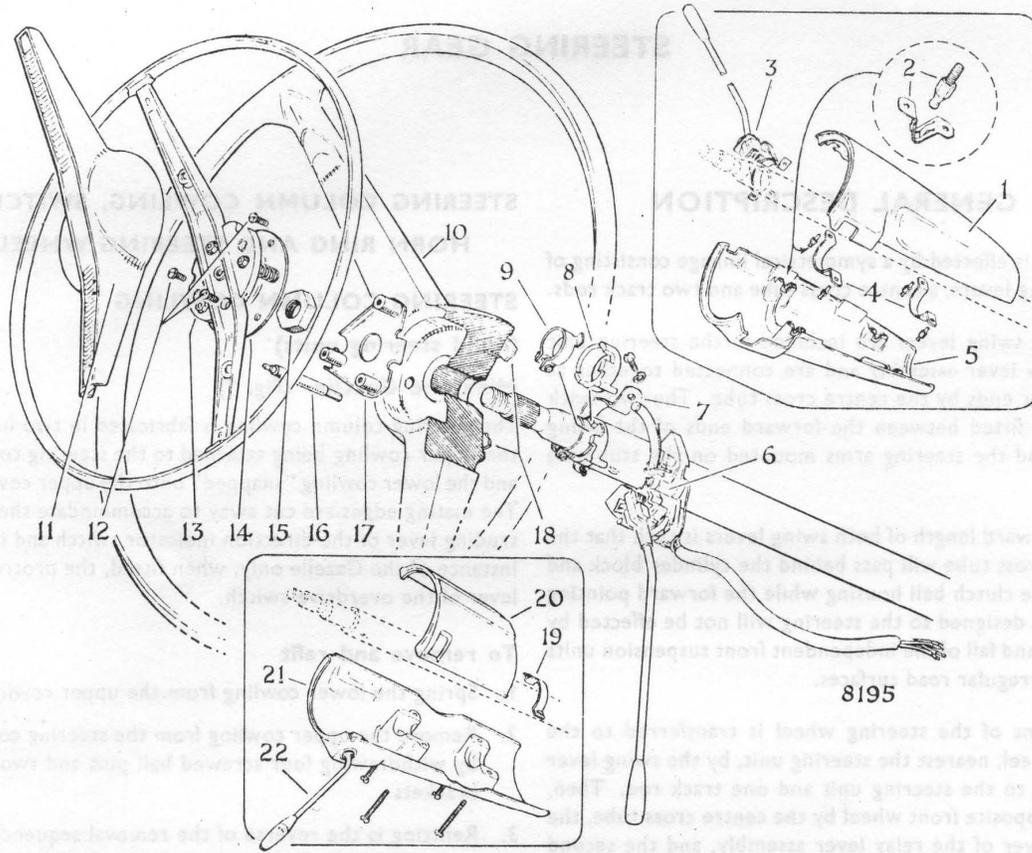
Exploded view of steering column cowling, switches, horn ring and steering wheel of the rigid steering unit. The top insert shows the Minx and Gazelle cowling with the Gazelle overdrive switch while the bottom insert shows the Super Minx and Vogue cowling with the Vogue overdrive switch.
